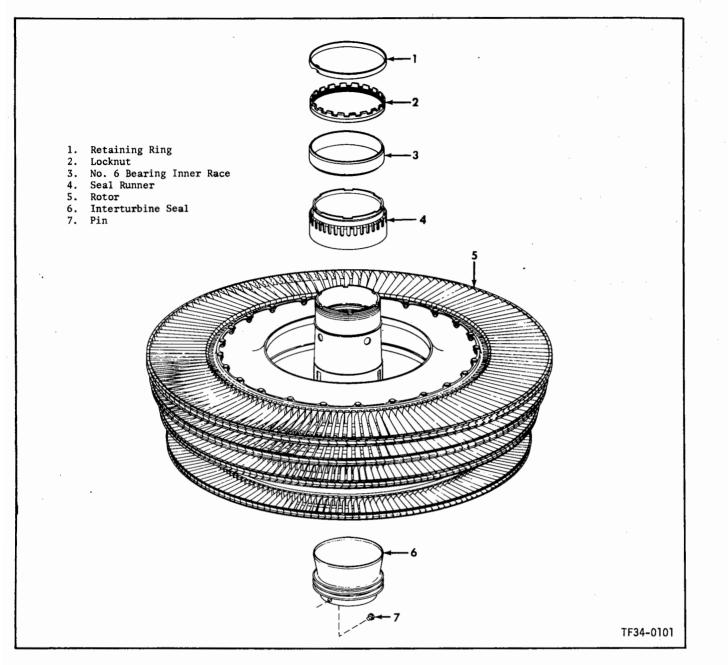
Assembly of Low-Pressure Turbine Rotor
